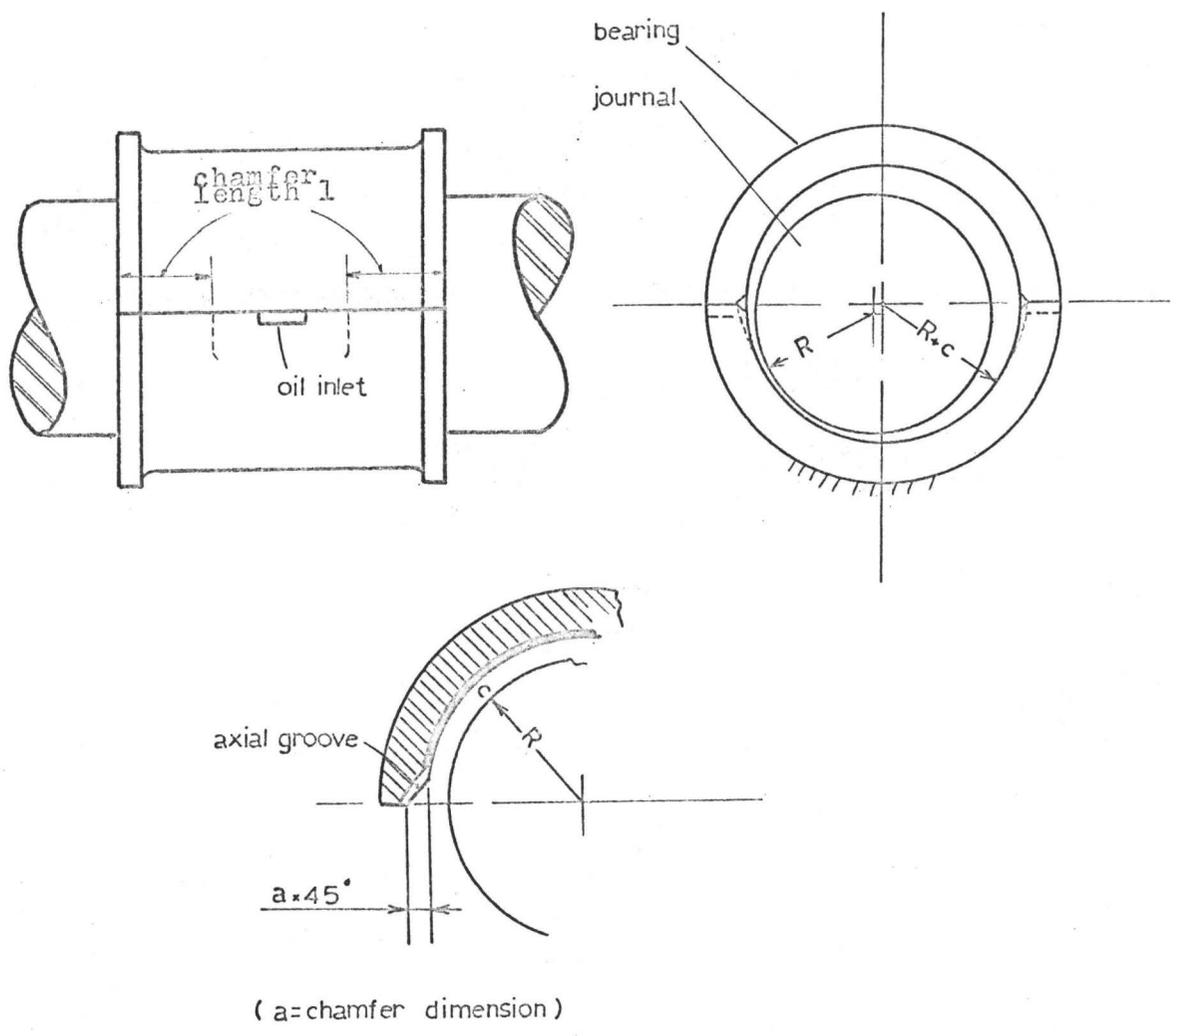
9 Cross section at chamfer opening for split cylindrical bearing
